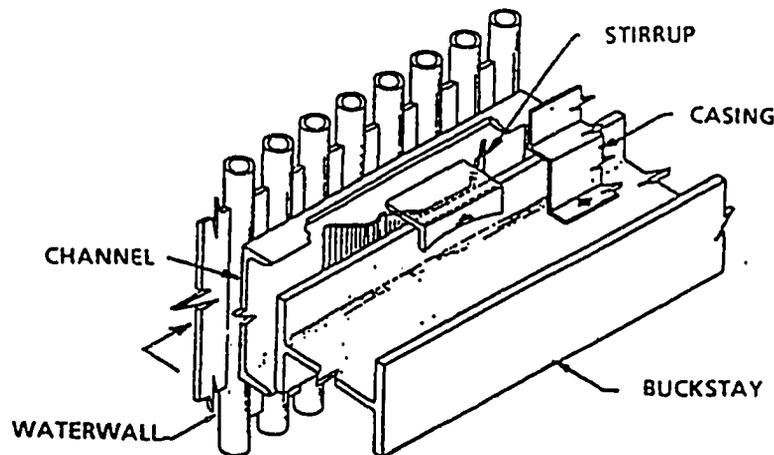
Standard Waterwall tube construction (Combustion Engineering Inc)
